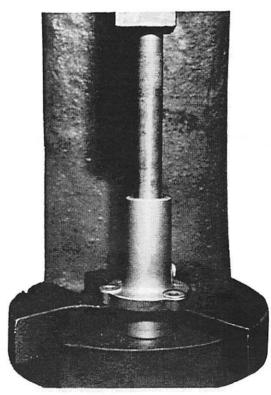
Removing Magneto Drive Bearing from Magneto Adaptor E-2:
